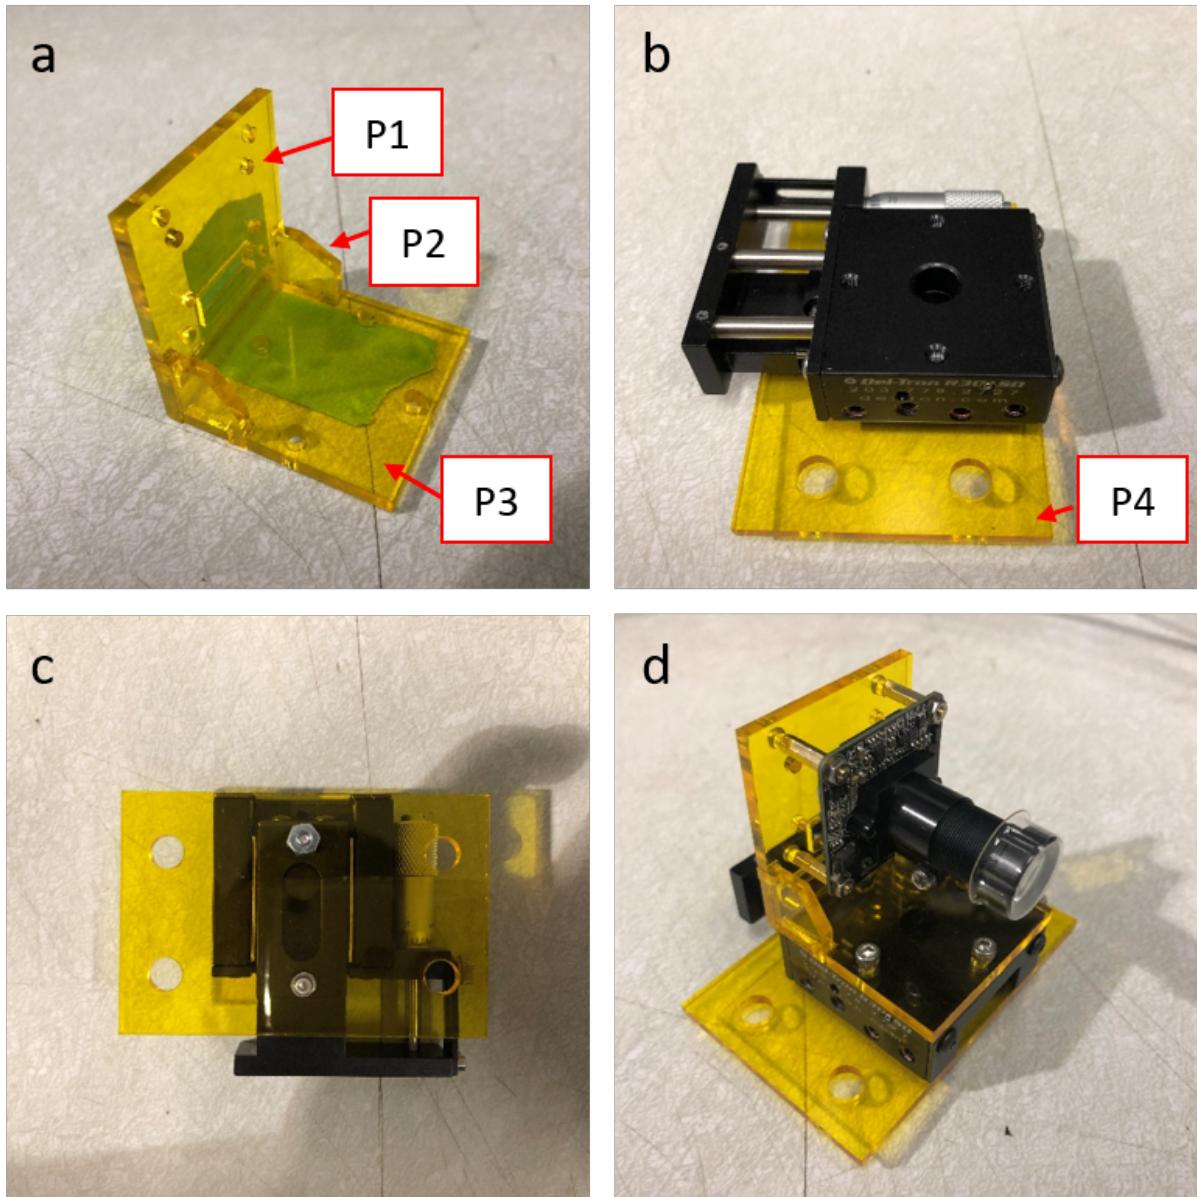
Close up images of the camera holder and X-axis stage. (a) P1, P2 and P3 welded together (b) top view of the stage mounted on P4 (c) Bottom view of the mounted stage on P4. (d) Assembled camera holder along with the camera.
